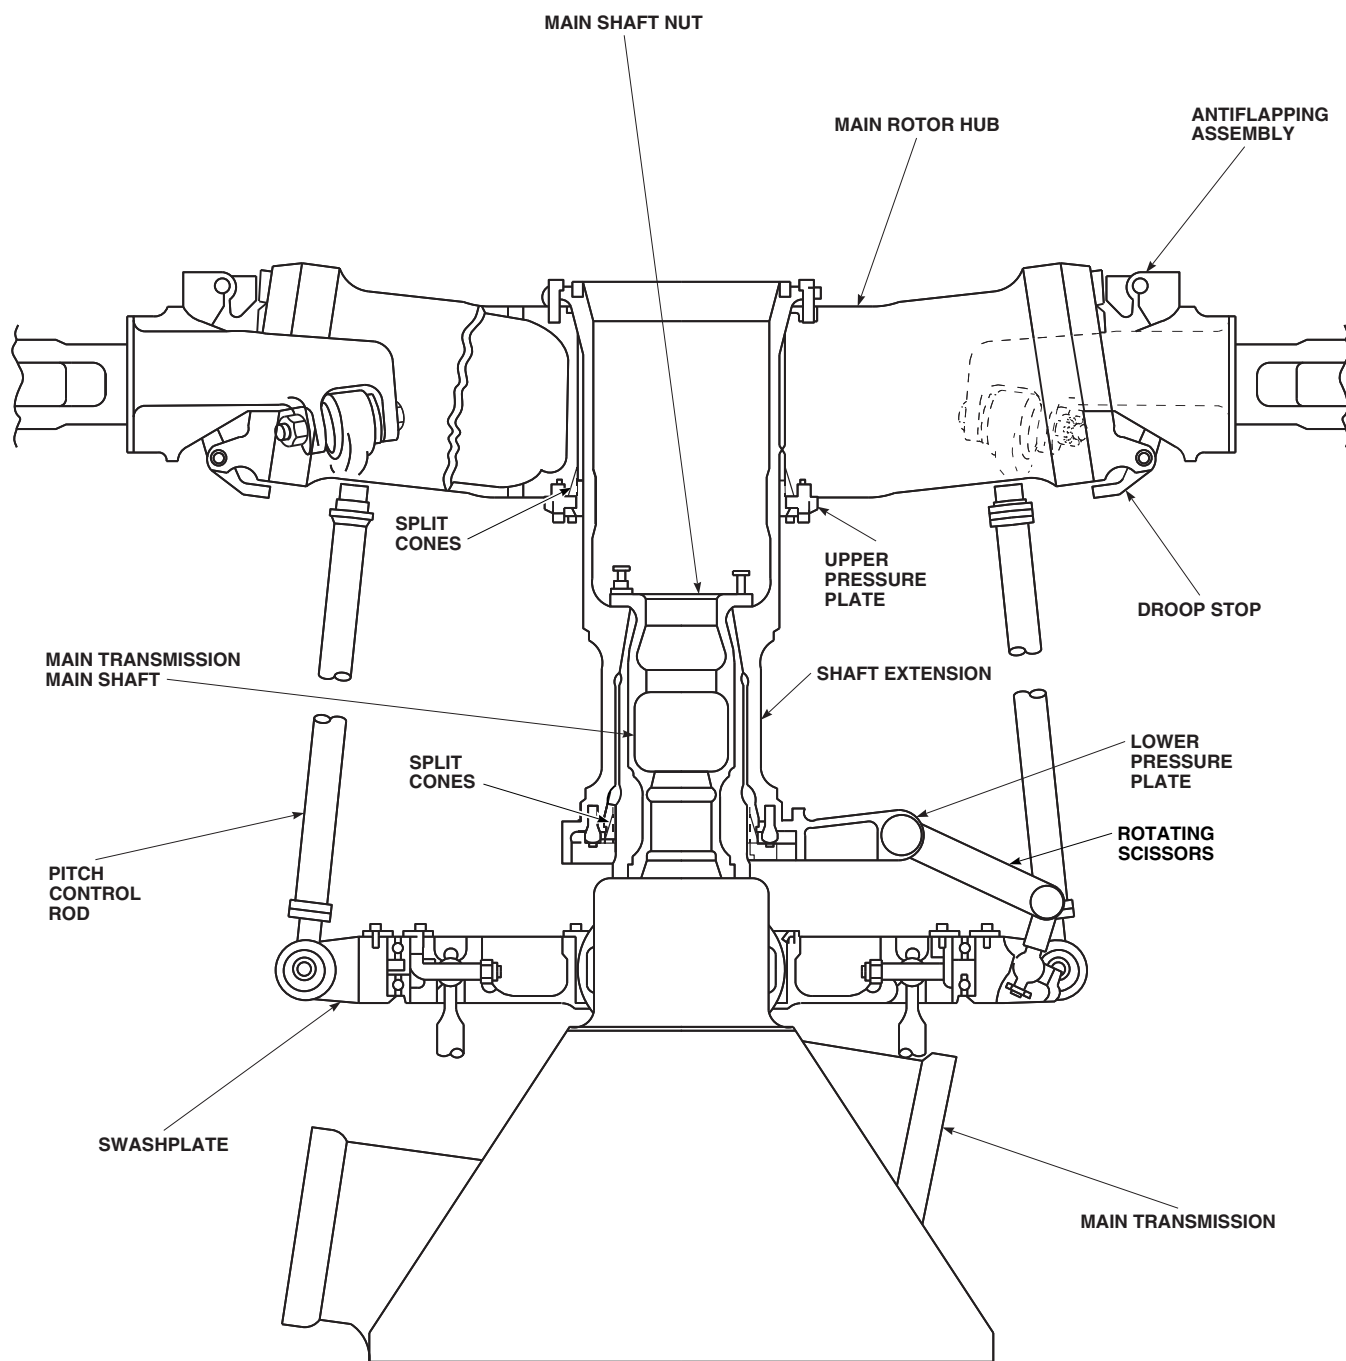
MAIN ROTOR HEAD AND MAIN TRANSMISSION
